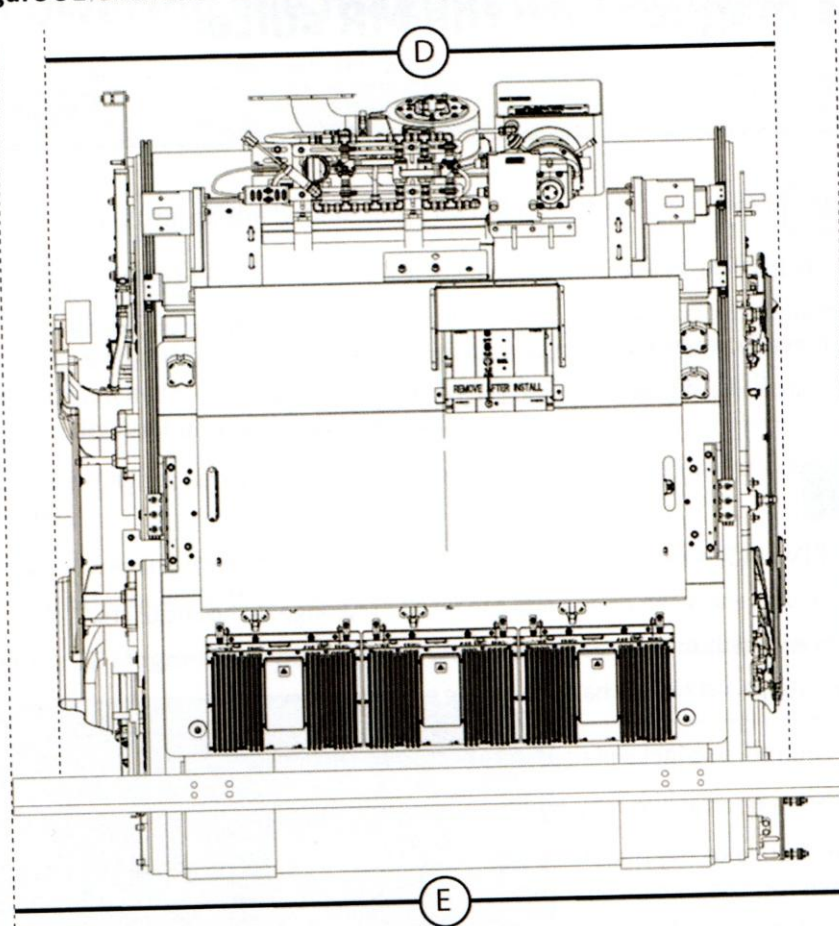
Clearance dimensions, magnet patient end as-shipped condition
